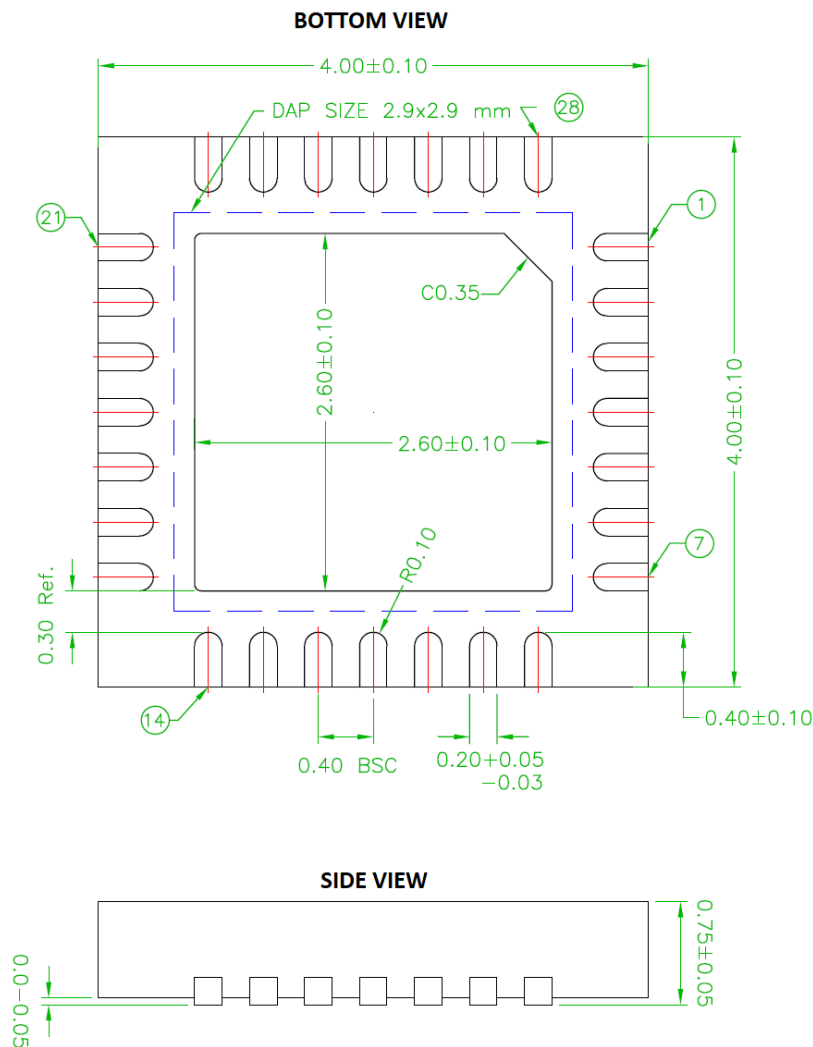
QFN-28 Mechanical Drawing (All dimensions are in millimetres)
